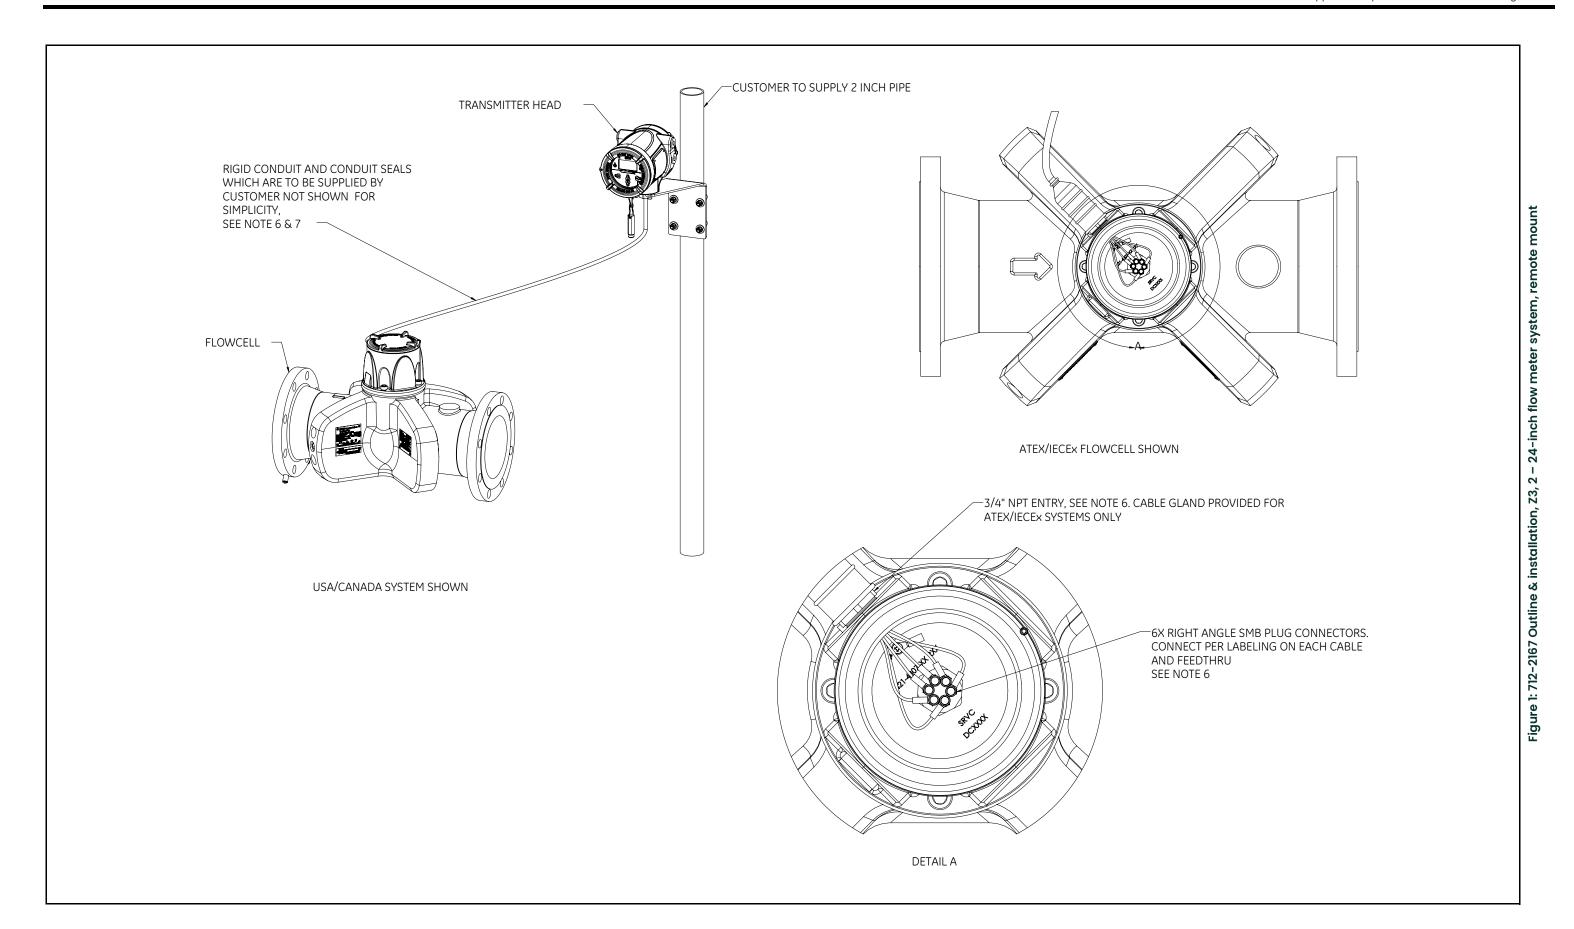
712-2167 Outline & installation, Z3, 2 – 24-inch flow meter system, rer
